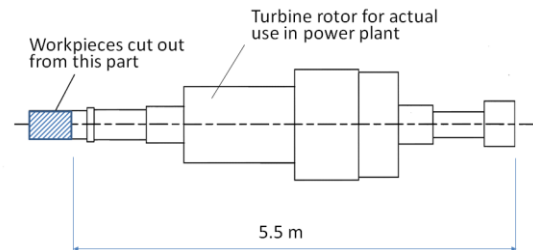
Blank of turbine rotor for actual use in power plant, from which workpieces in this study were cut out.
